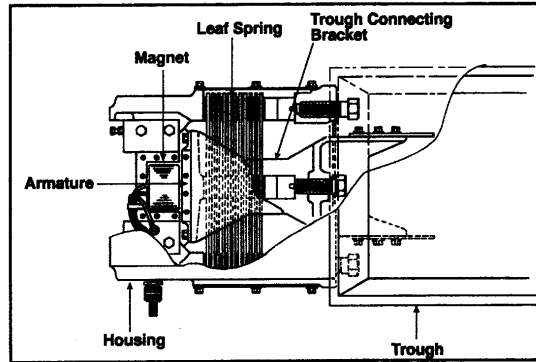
TYPICAL VIBRATING FEEDER ASSEMBLY
